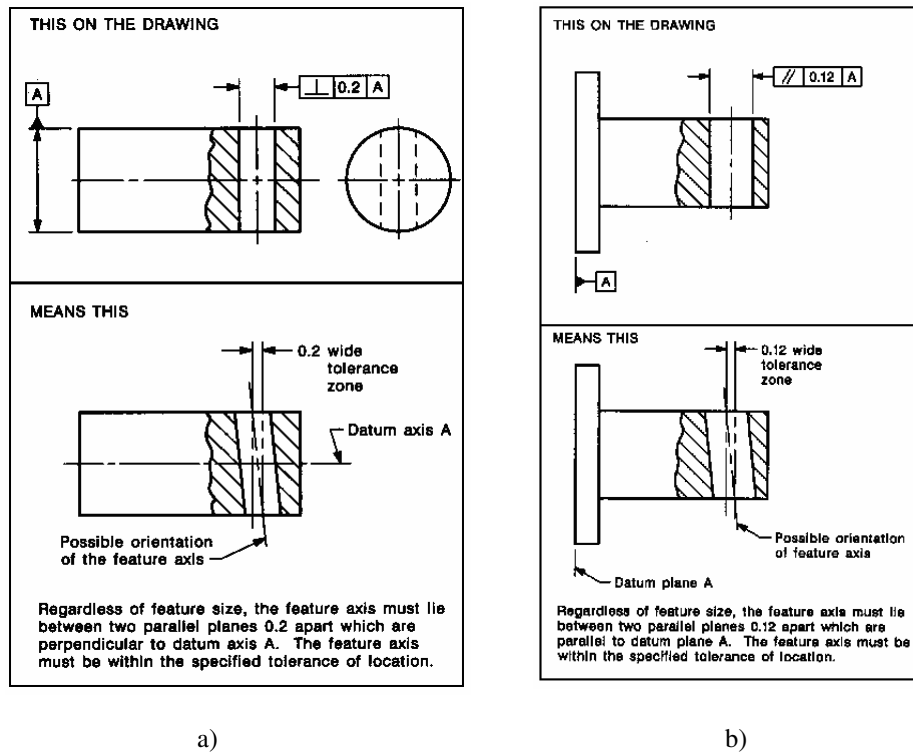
a) Perpendicular and b) parallel tolerance definitions (ASME,1994)
